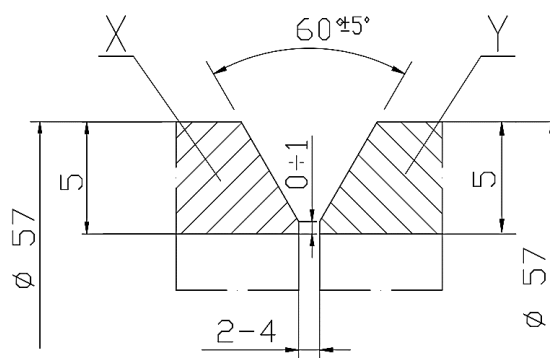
Detail of the PT examined weld No. 2
